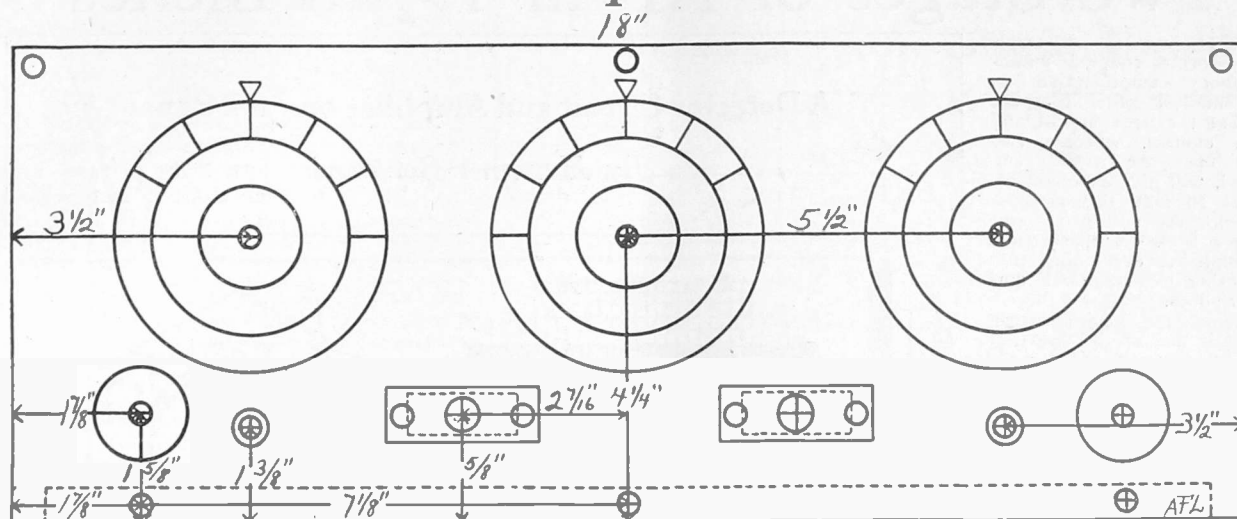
Panel dimensions given on the above illustration are to be followed out to the letter. Only the center holes for the coupler and condensers are shown, as the mounting holes depend on the make of condenser to be used. The oblong dotted lines are for the cam switches, the template for which was published in Part 1 of this article, issue of August 23.
